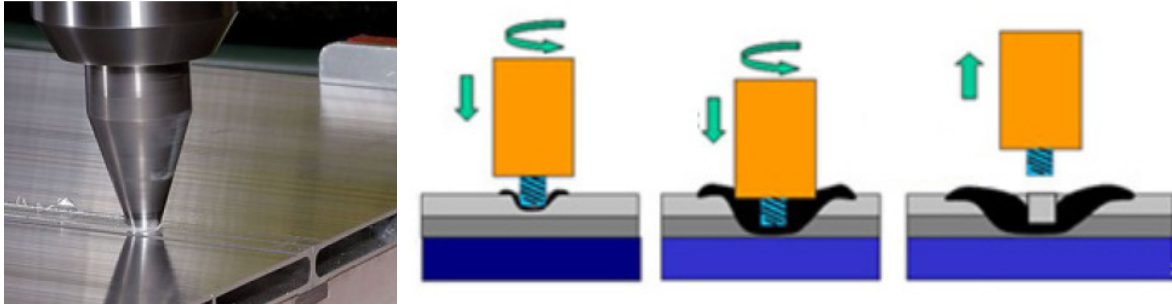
Friction stir welding (left) and friction stir spot welding (right) (Source: CEWAC)
